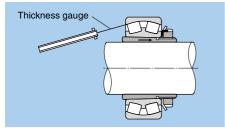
Measuring Internal Clearance of Self-Aligning Roller Bearings
